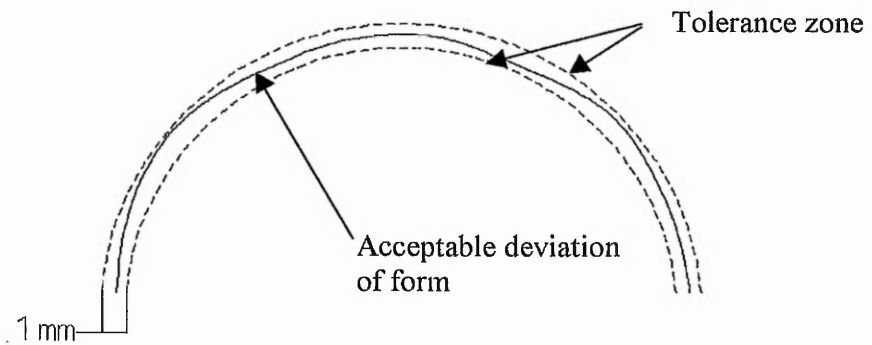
Tolerance zone of 1mm, for a cylindrical surface.
